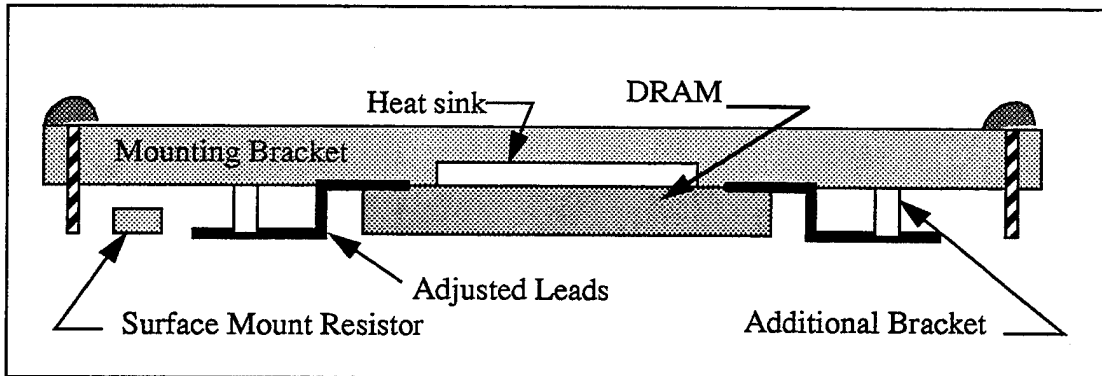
DRAM Chip Pin and Mounting Bracket Adjustment.
